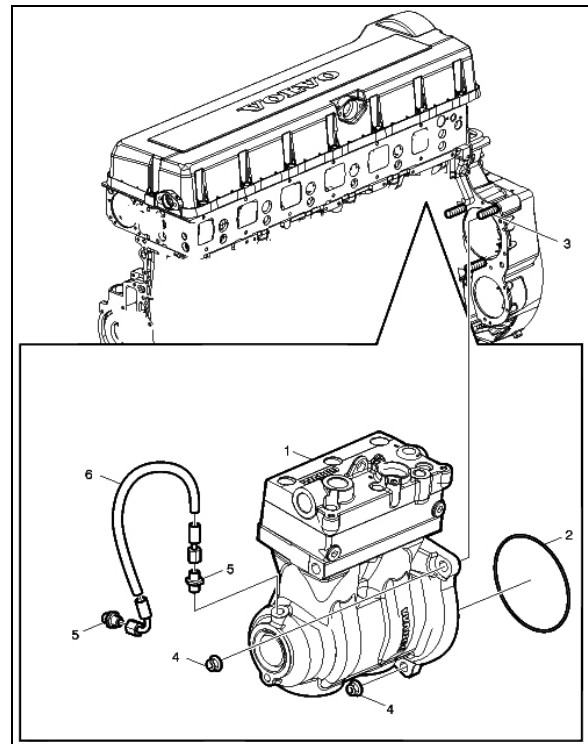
AIR COMPRESSOR LOCATION 03061
